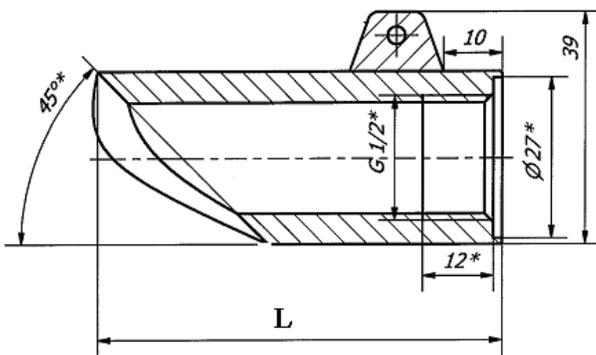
Dimensions of the fastening bushing when pipe DN < 65 mm
